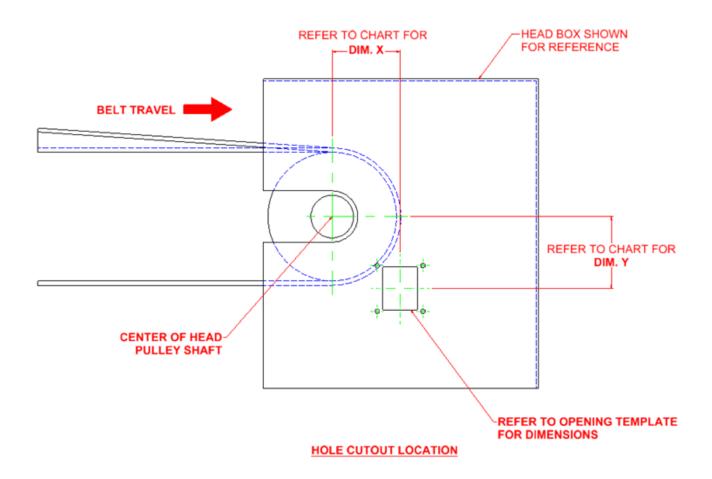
X and Y Hole Center location and Cutout for Mounting Template
